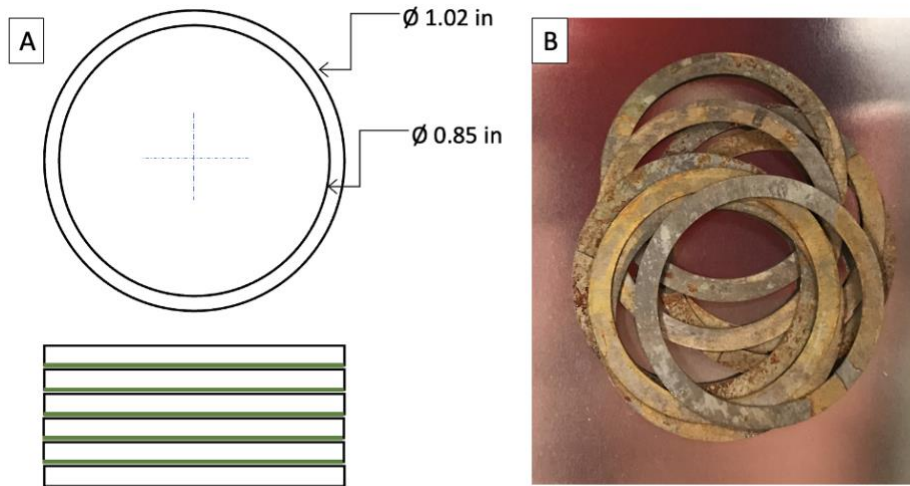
A) Schematic of the toroidal testing setup used in this project, and B) Fe-4Si-4Cr rings produced for magnetic testing via EDM.
